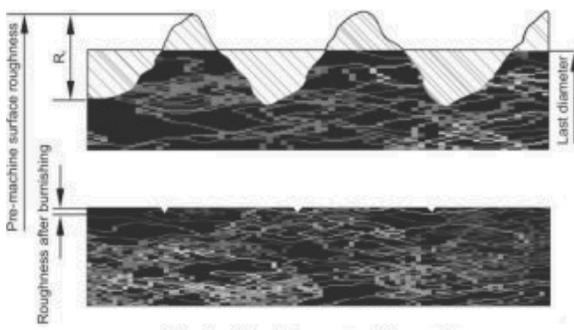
Surface profiles after pre-machining and after roller burnishing [16]
